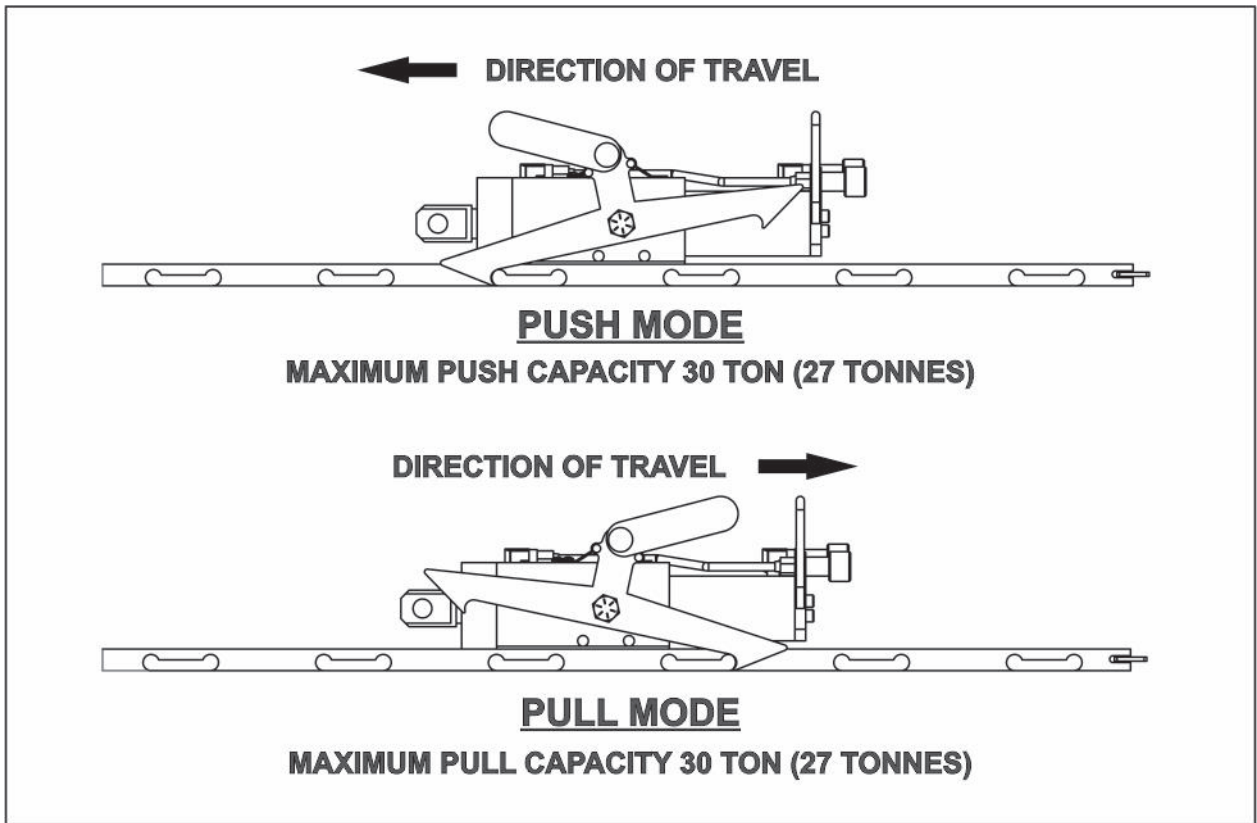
Push/Pull Configuration for XLP30 Cylinder Assembly
